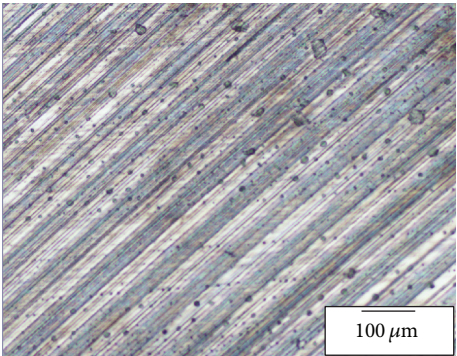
Optical microscopy of the machined surface under spindle speed = 1250 rpm, depth of cut = 0.5 mm, and table feed rate = 125 mm/min.
